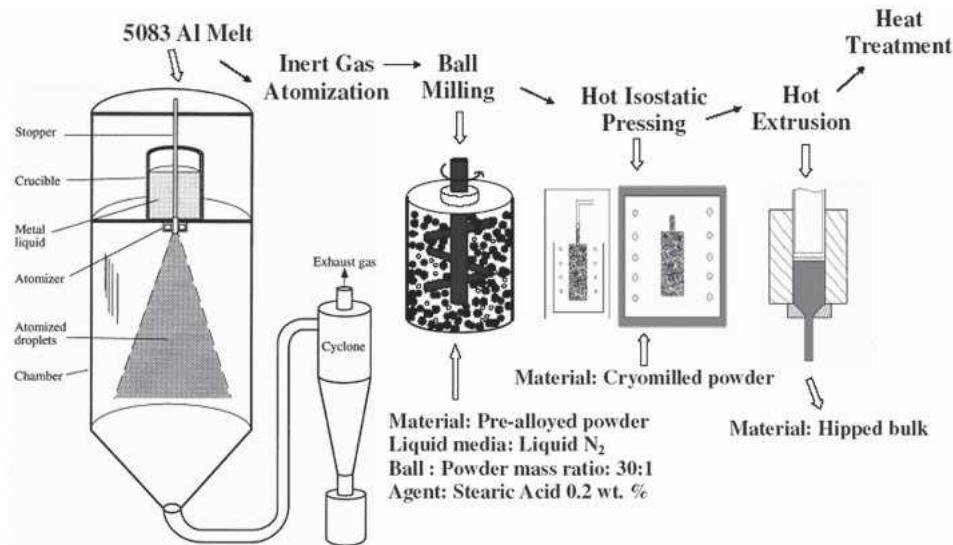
Processing steps to produce bulk cryomilled UFG 5083 Al alloy.
